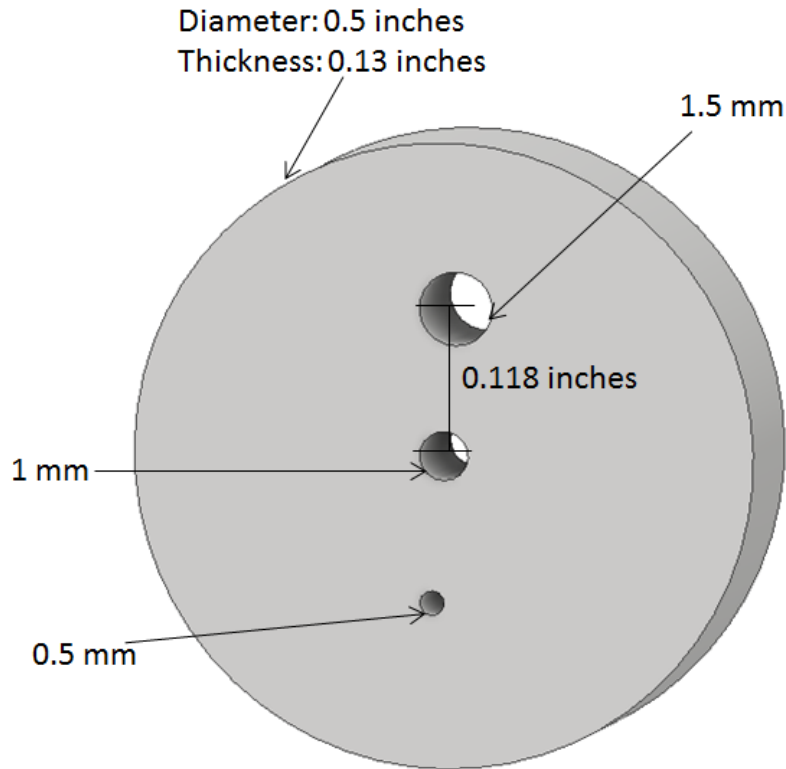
CAD drawing of the aperture. See Appendix Figure 2 for detailed drawings.
